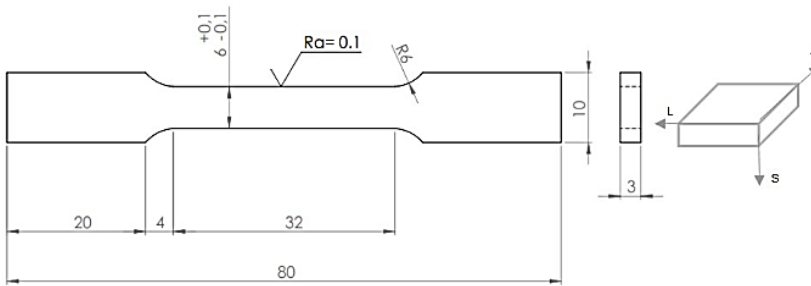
Geometry and dimensions (in mm) of the tensile samples.
